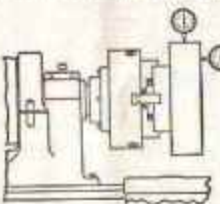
Testing Accuracy of Chuck Jaws on Diameter and Face
